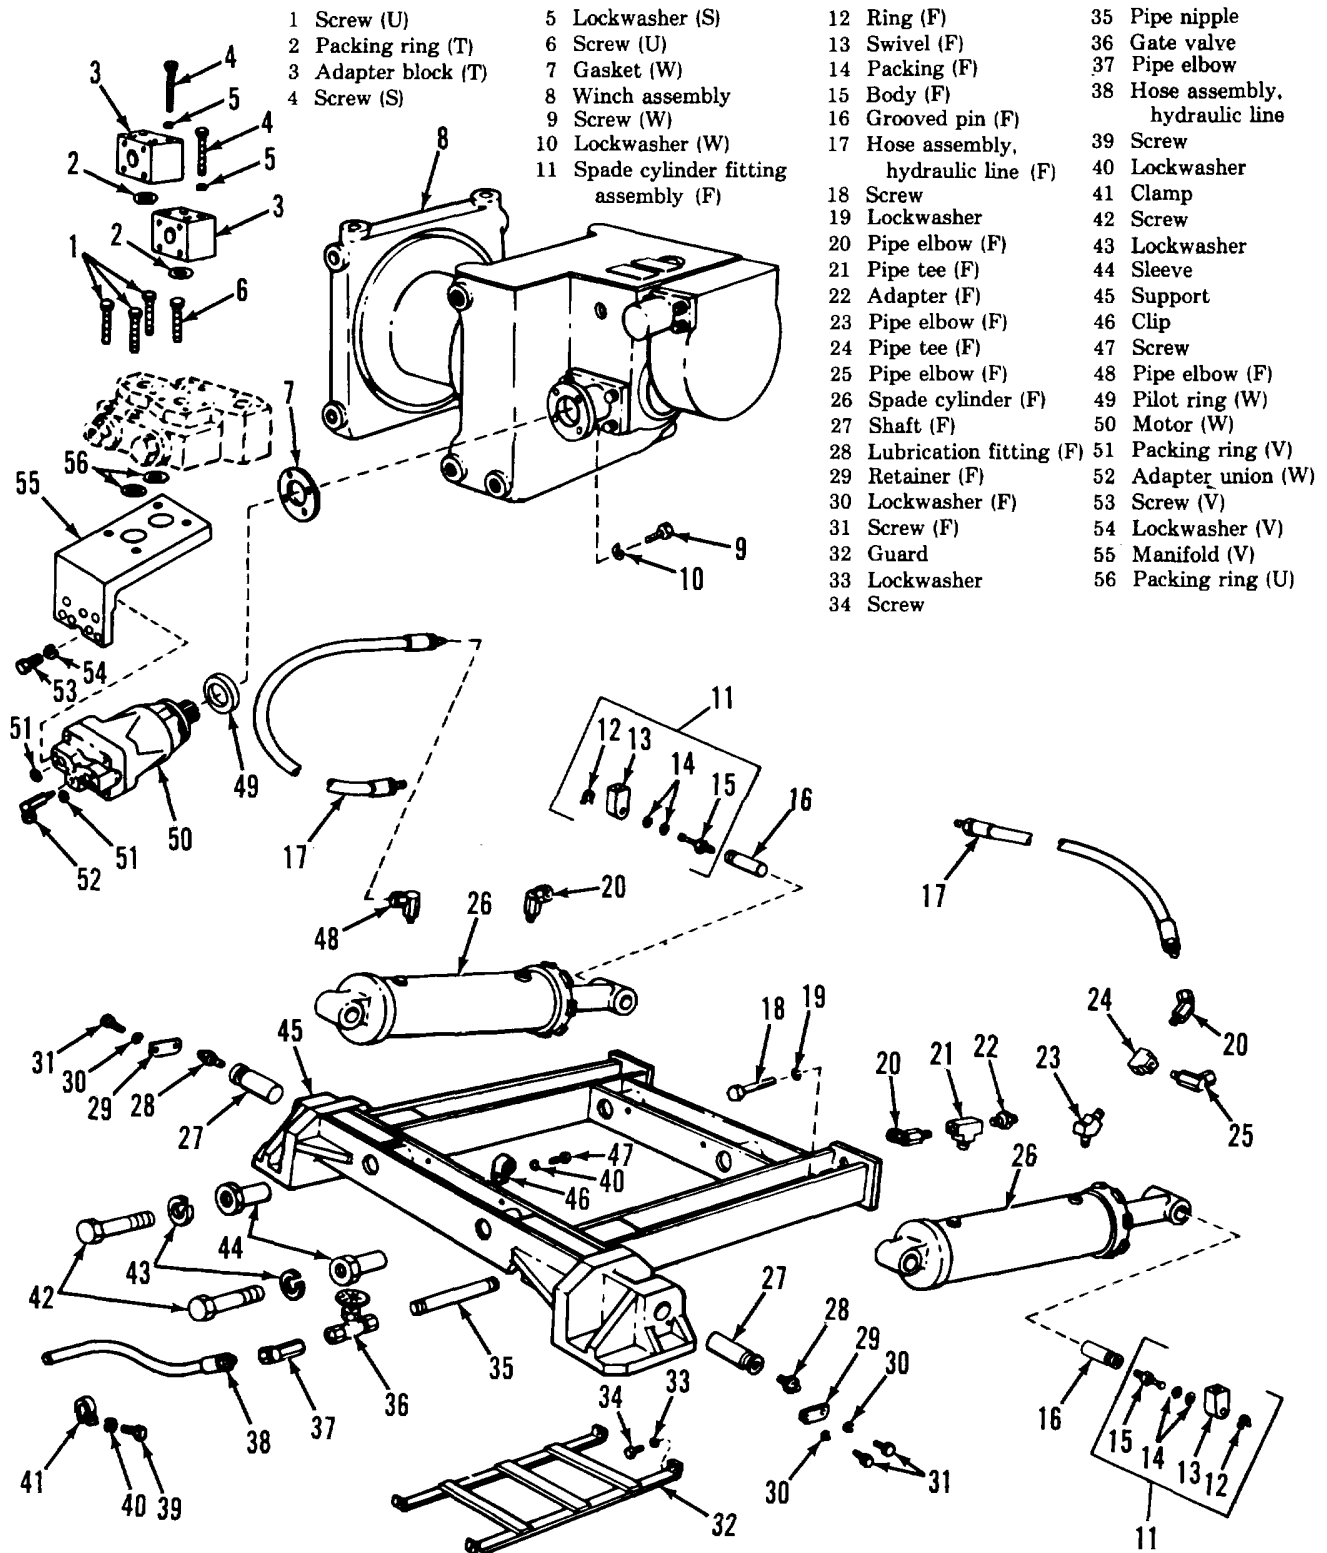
Main Winch, Motor, and Attaching Parts.
